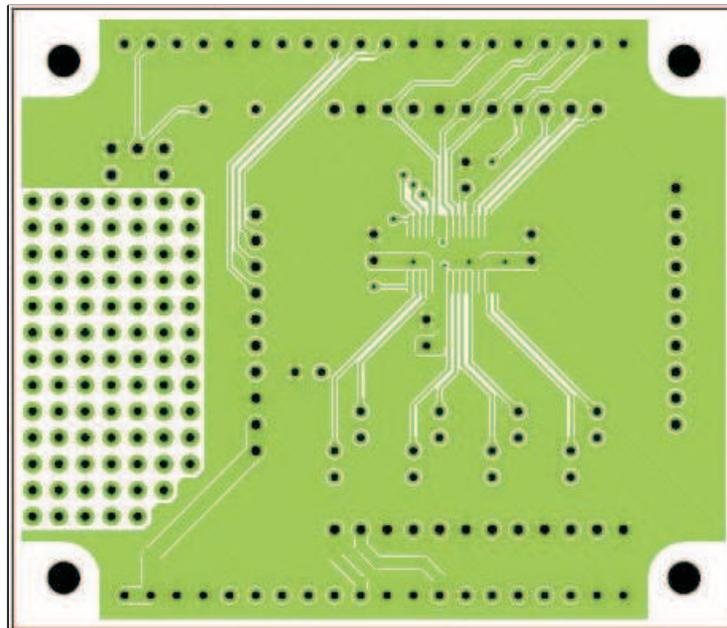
DEM-PCM1780/81/82 Board Layout—Top (Component) Side
